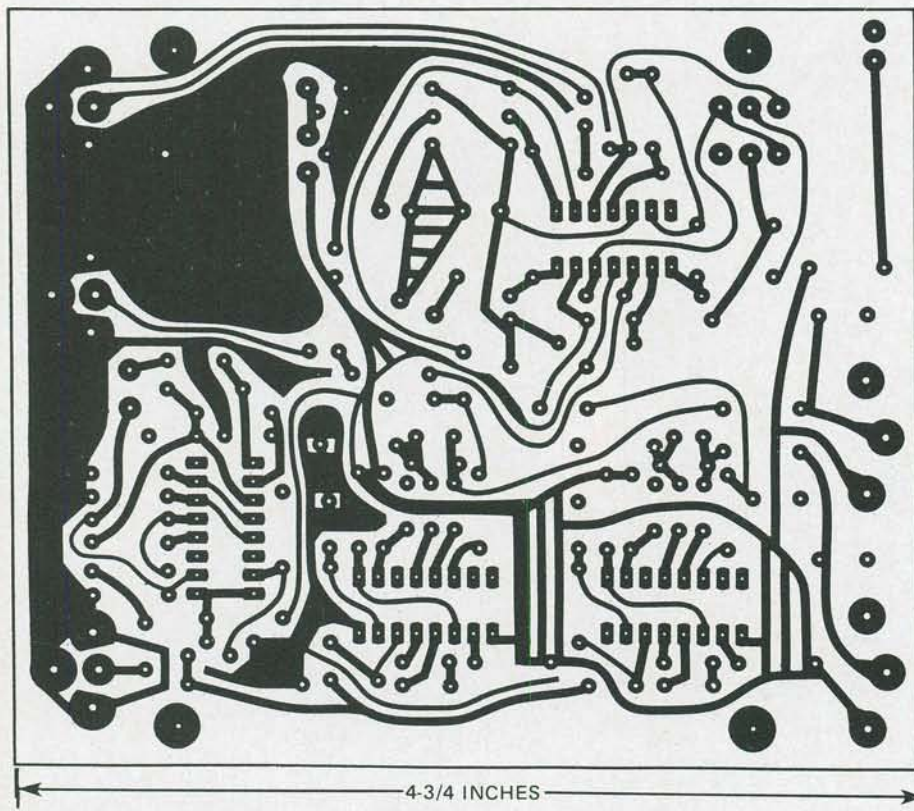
SOLDER SIDE of the demodulator's circuit board.
